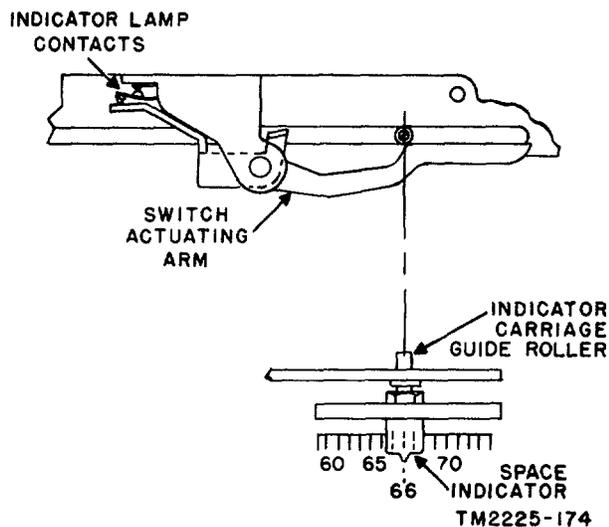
End of line indicator mechanism lamp (TT-76/GGC).
